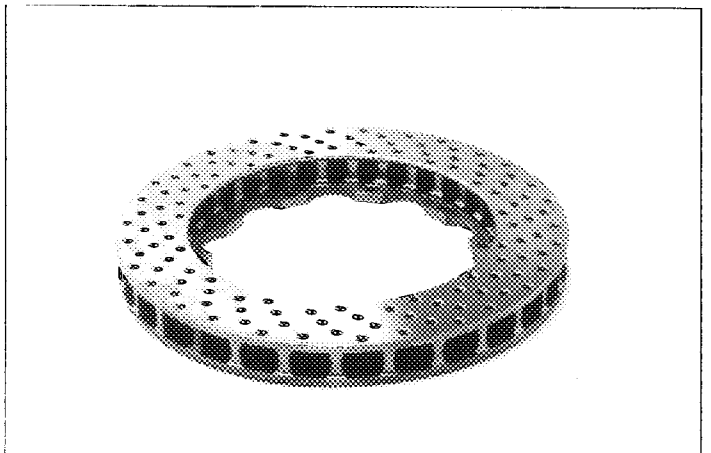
Front and/or Rear brake discs, TYPE Z,
